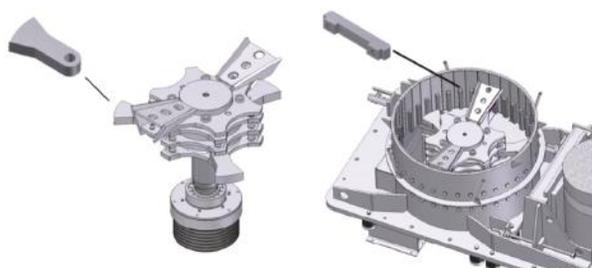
The BHS Biogrinder RBG 08 machine turning and fix parts
